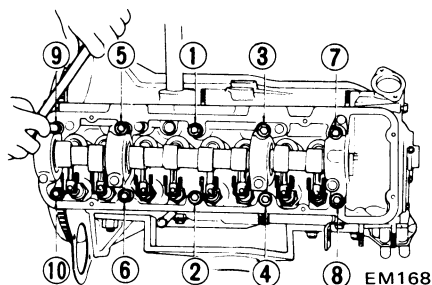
Tightening Sequence of Cylinder Head Bolts
